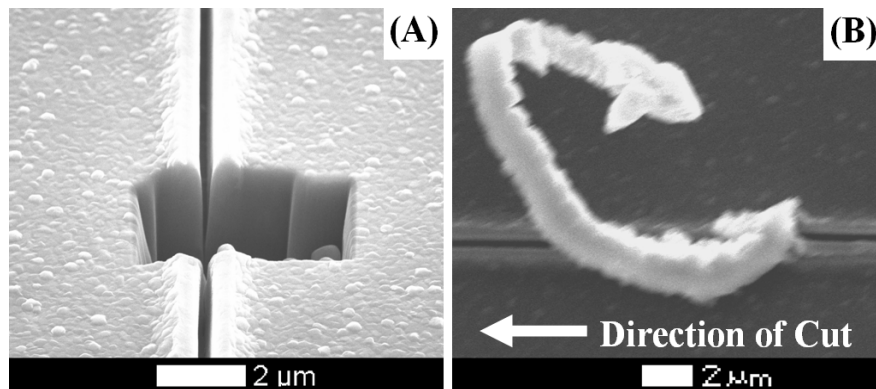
FIB Cross-section from 1st tool pass (A) and chip formed during 2nd tool pass (B) at 25 mm/min with a 1.2 mN load
